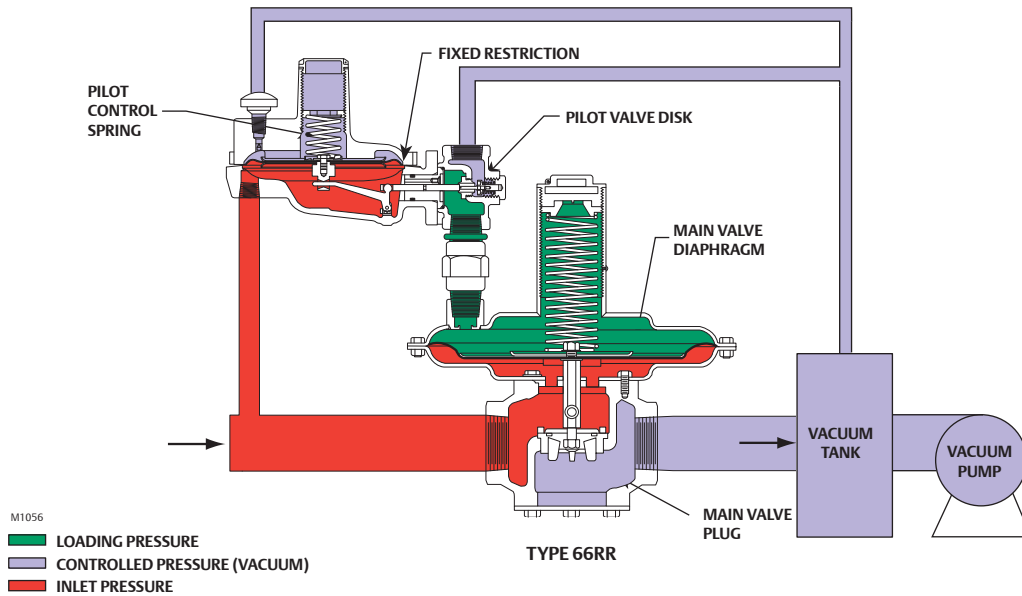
Type 66RR Relief Valve used in a Vacuum Breaker Installation
